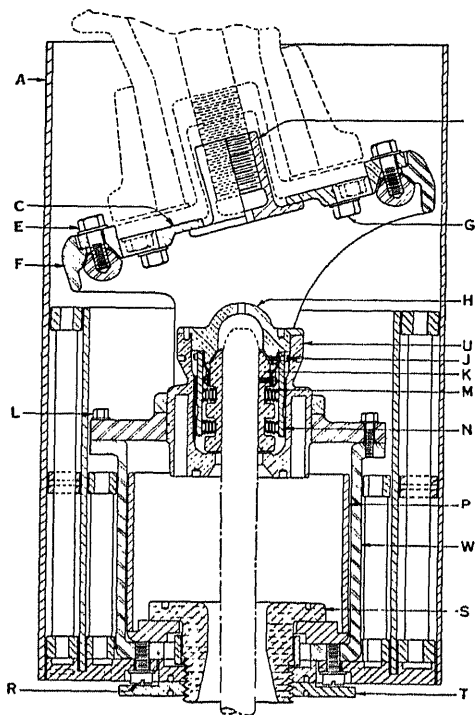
Explosion-pot details for General Electric breakers of 110-, 88-, and 73-kv.
